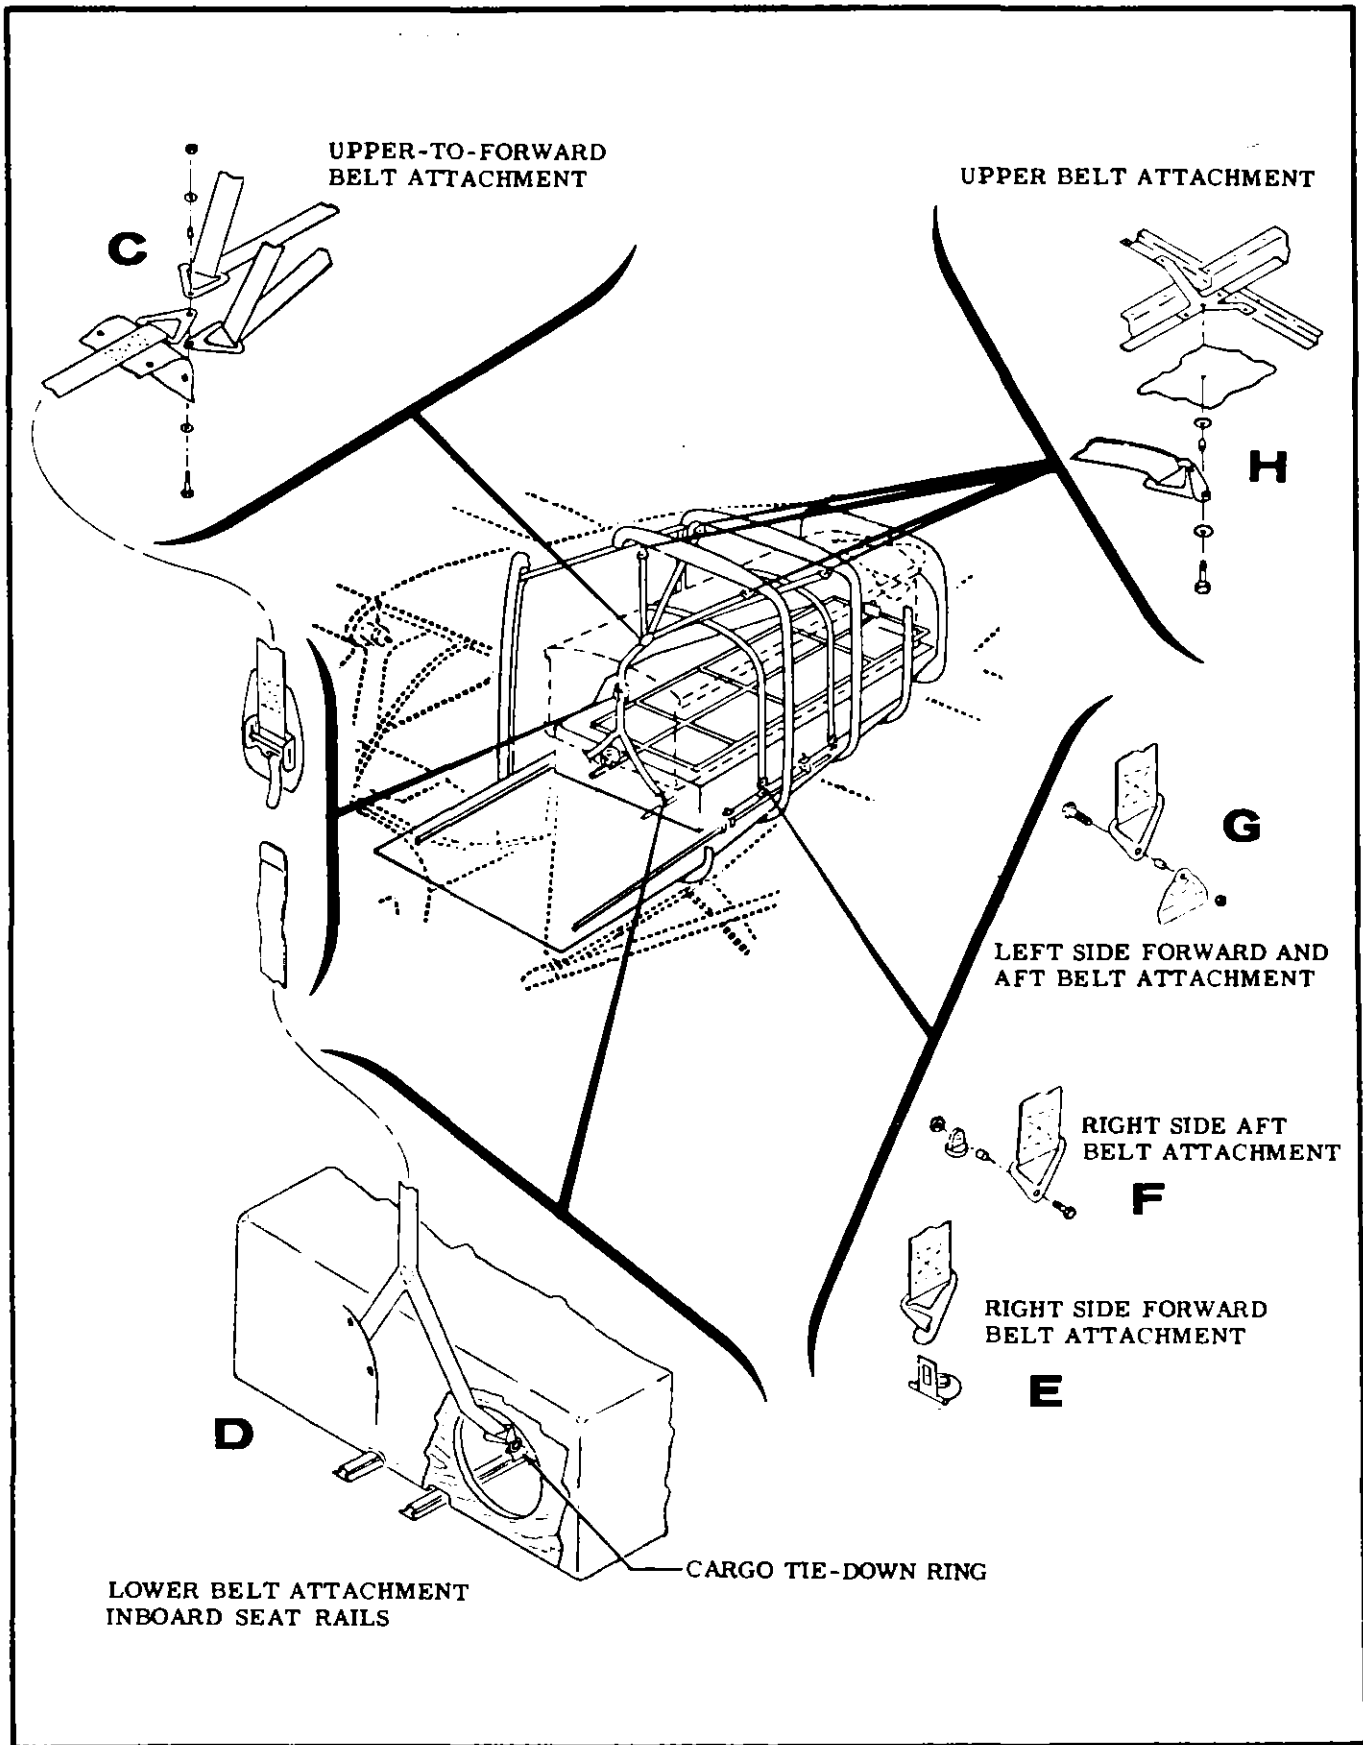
Casket Carrier Installation (Sheet 2 of 2)
